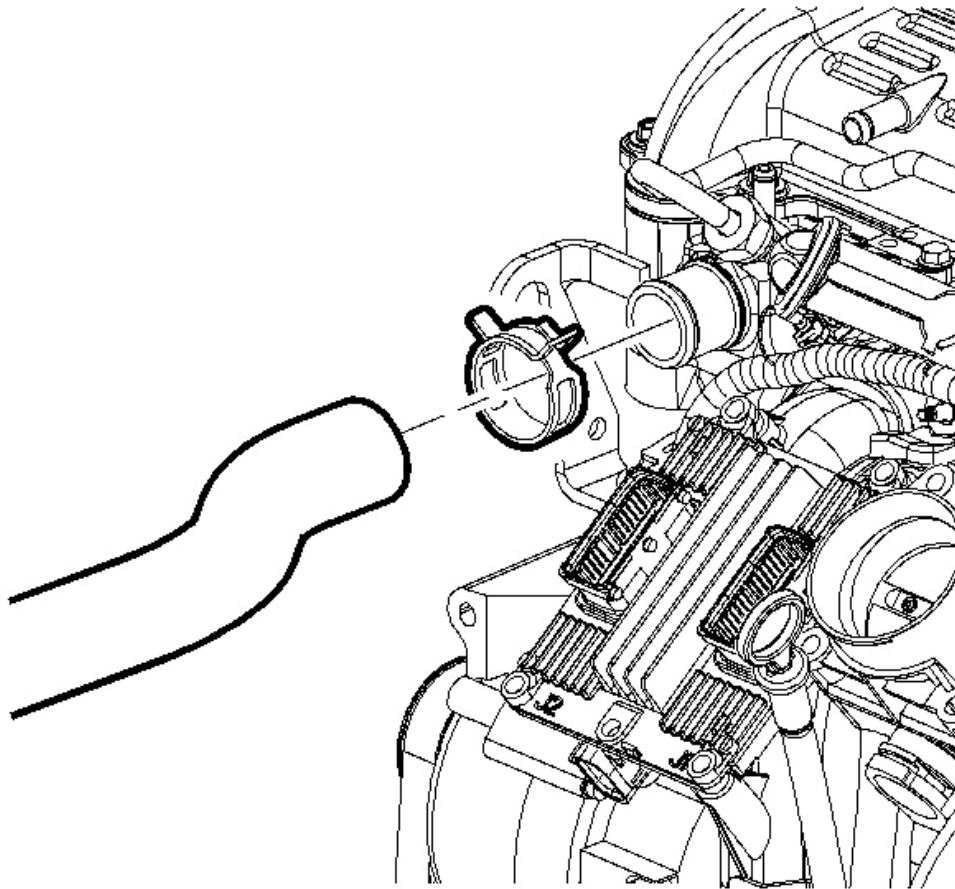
Removing Upper Radiator Hose From Cylinder Head
